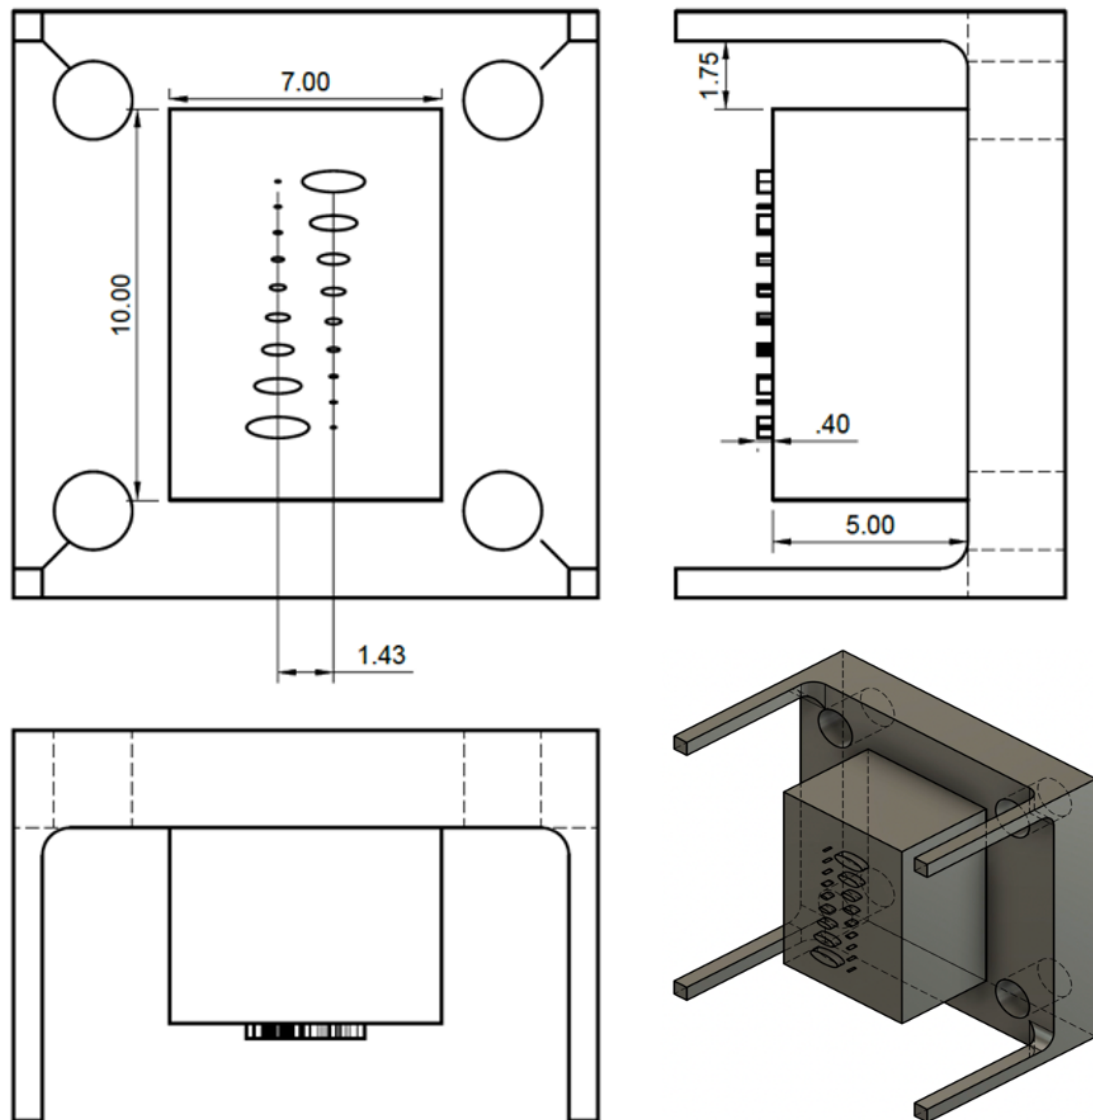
CAD design for a master mold with ellipse-shaped pillars on the surface.
